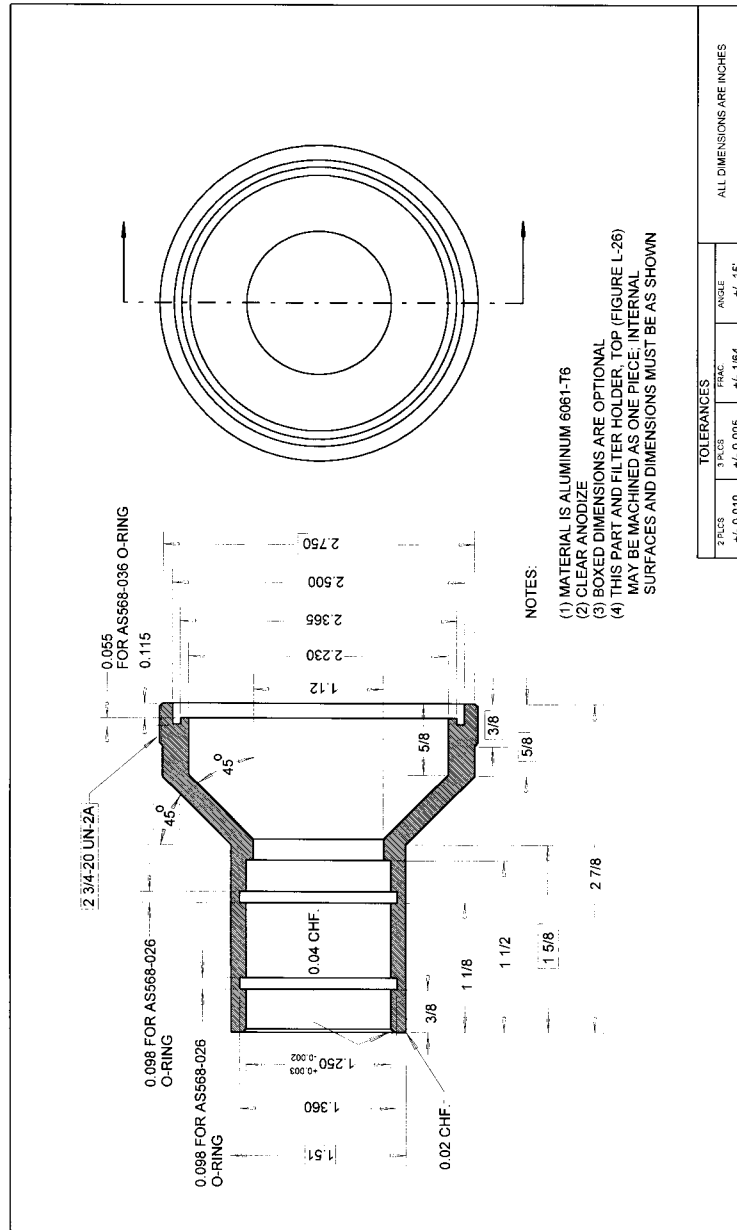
FILTER HOLDER, ASSEMBLY
